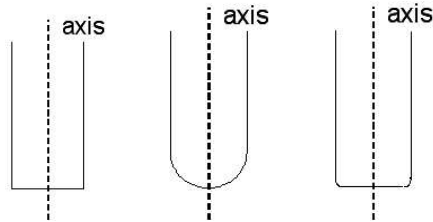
Tool shapes: ball end cutter, torus cutter, flat end cutter.
